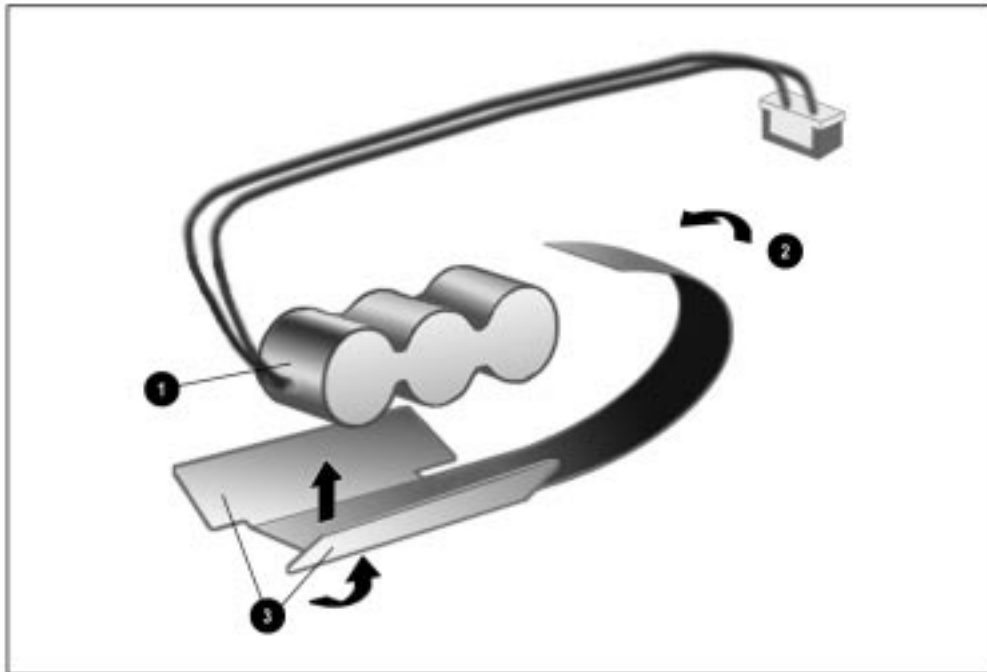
Attaching the Insulator to the Auxiliary Battery
